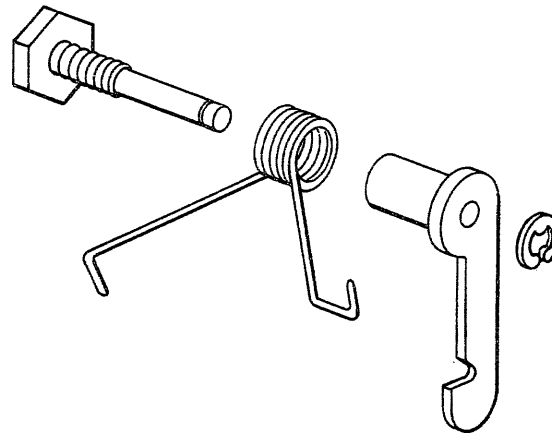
Cycle-Shaft Check-Pawl Assembly
